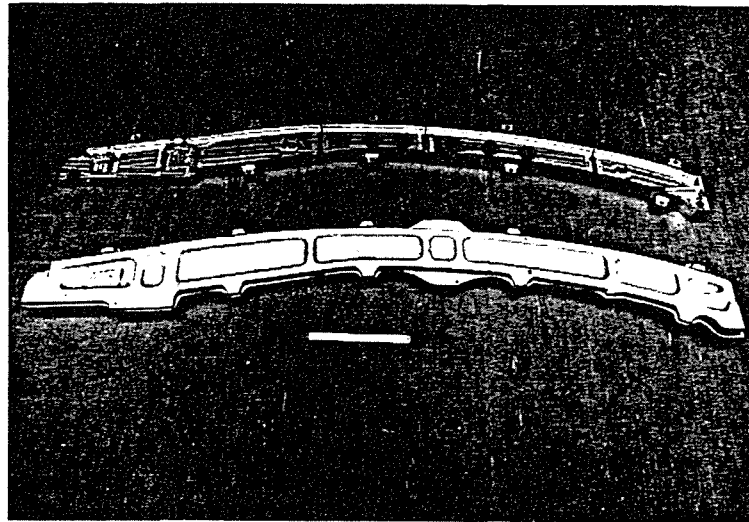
Typical 8090-T852 cold compressed die forgings for EH101 main cabin frame, before and after machining.
